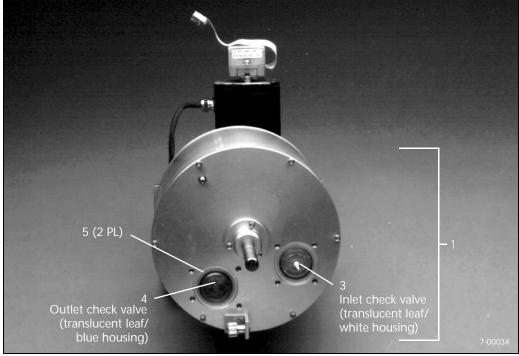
Piston/cylinder and motor/encoder assemblies (Sheet 1 of 2)
